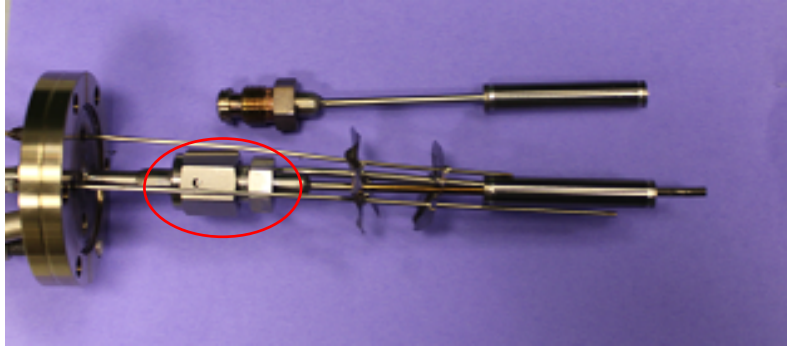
Can-type Specimen Design. The red circle shows where the new VCR fitting specimen assembly will be attached.
